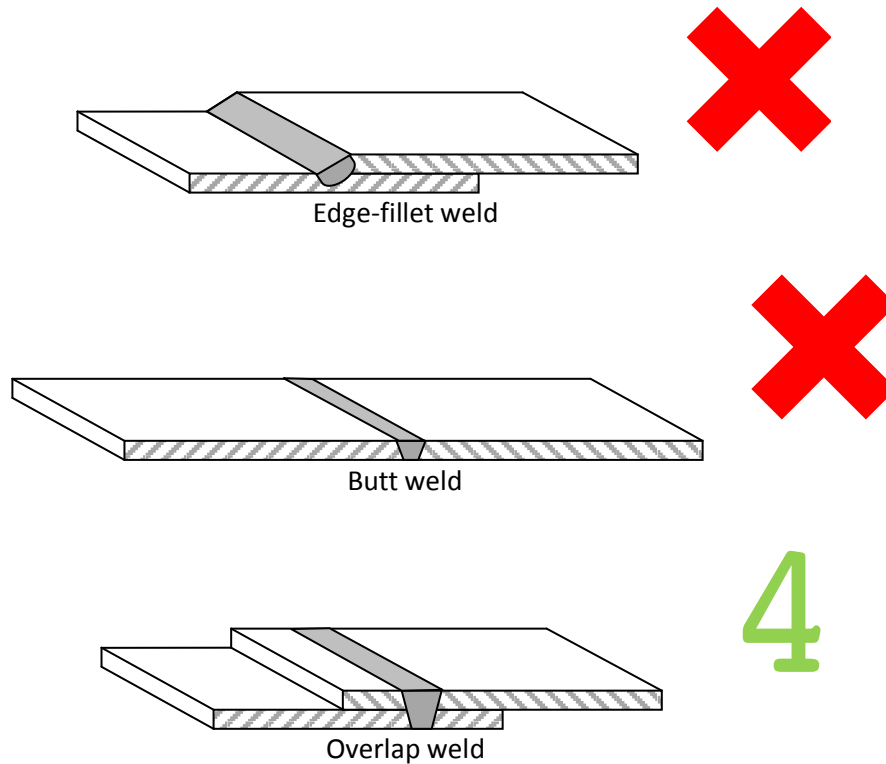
Schematic: Permissible joint configurations for remote laser welding
